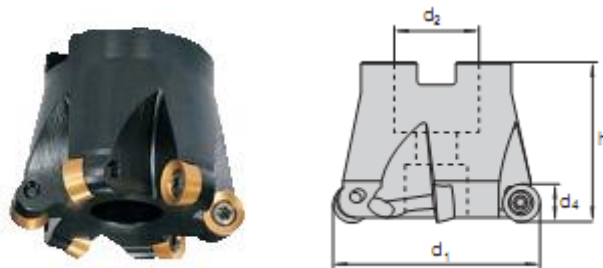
Inserted face milling tool (Fette FCT 11355) and respective geometry
